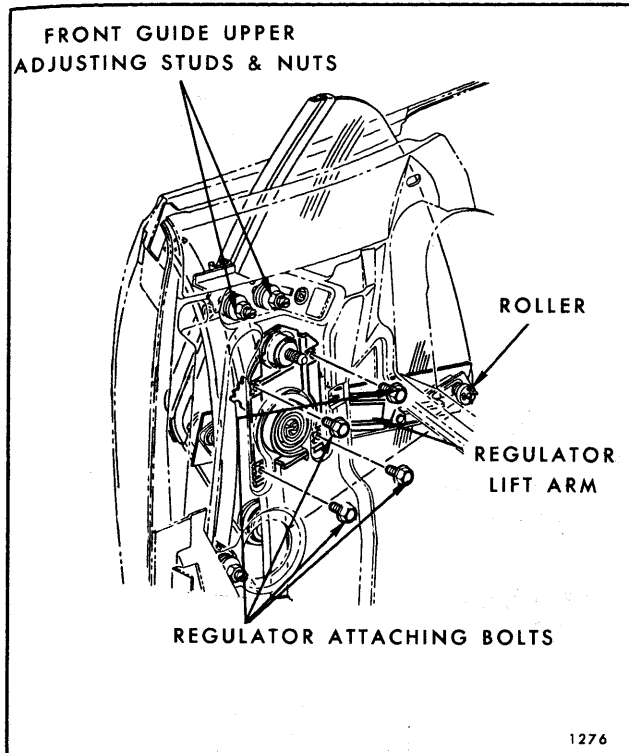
Rear Quarter Window Regulator Attachment - "Z-67" Styles
